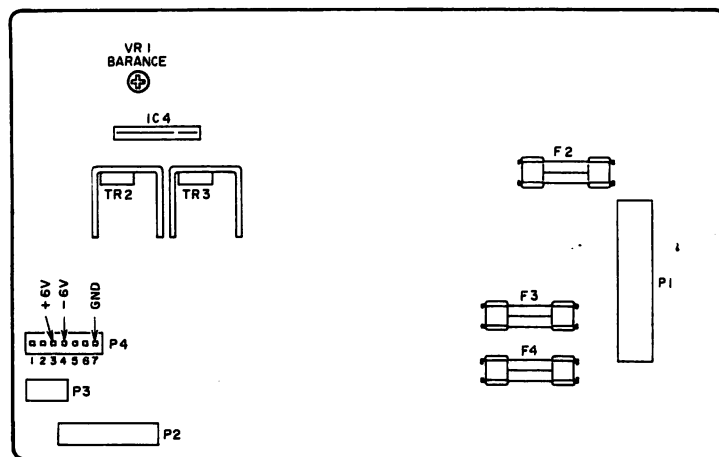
POWER SUPPLY PCB Adjustment Points
